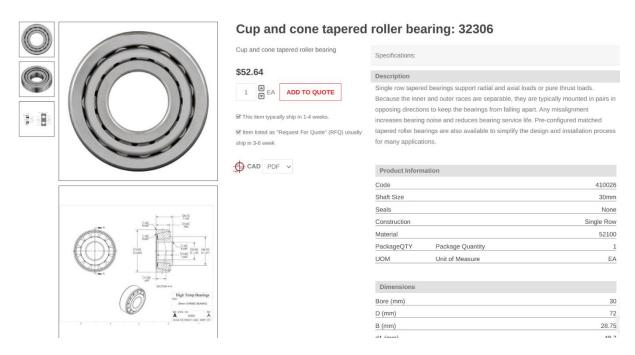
Tapered Roler Bearing Model suggested for design [11]
